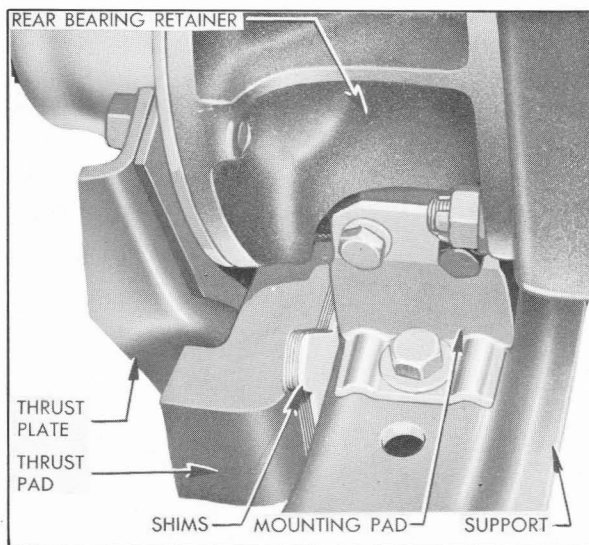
Transmission Mounting and Thrust Pads and Shims
